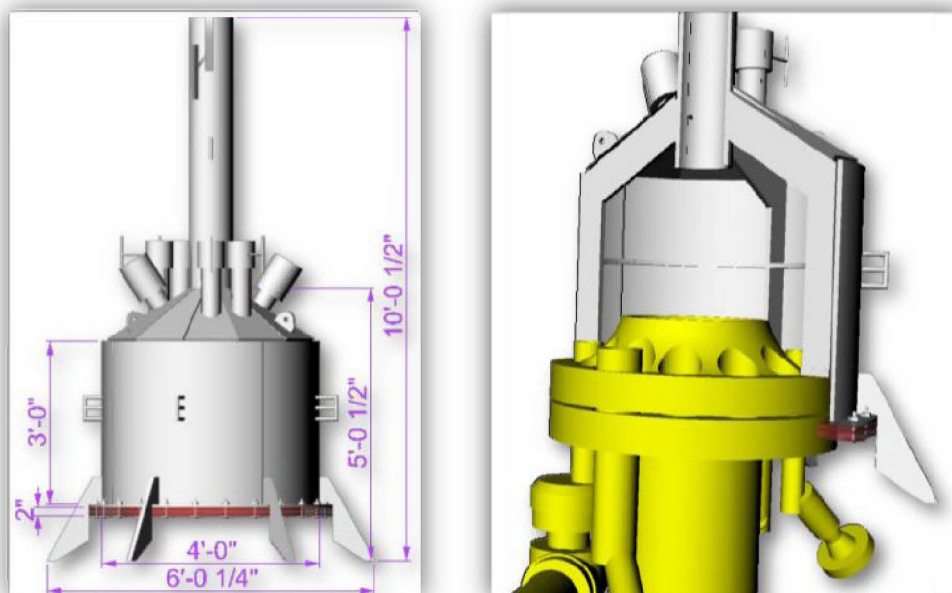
Top hat (left) with dimensions, (right) side view of a cross section of top hat on riser adapter flange (Energy 2010).
